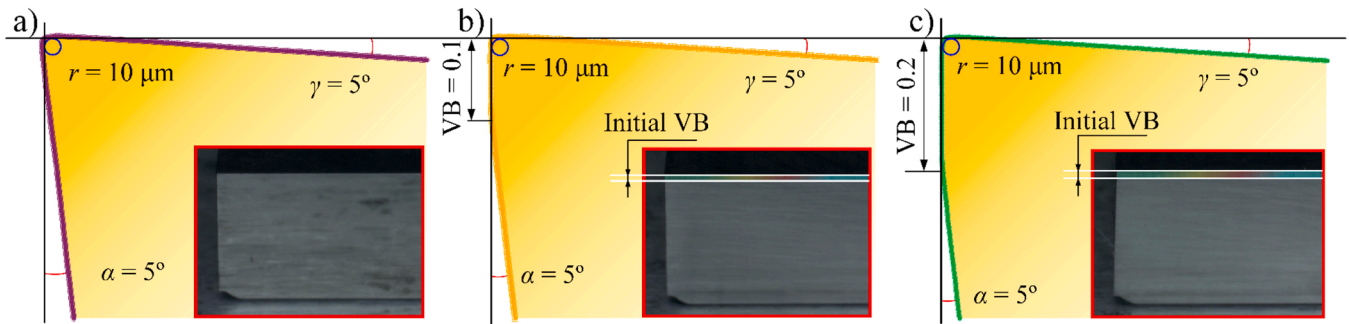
Characterization of insert shapes with different initial flank wear conditions through Alicona, a) initial VB = 0, b) initial VB = 0.1 and c) initial VB = 0.2.
